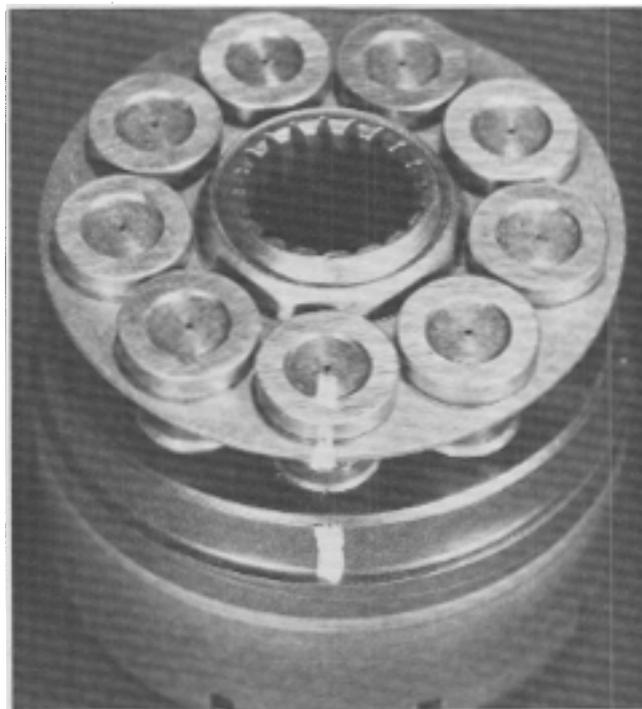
Before removing Piston, Mark both Piston and Cylinder Bore with Tape
